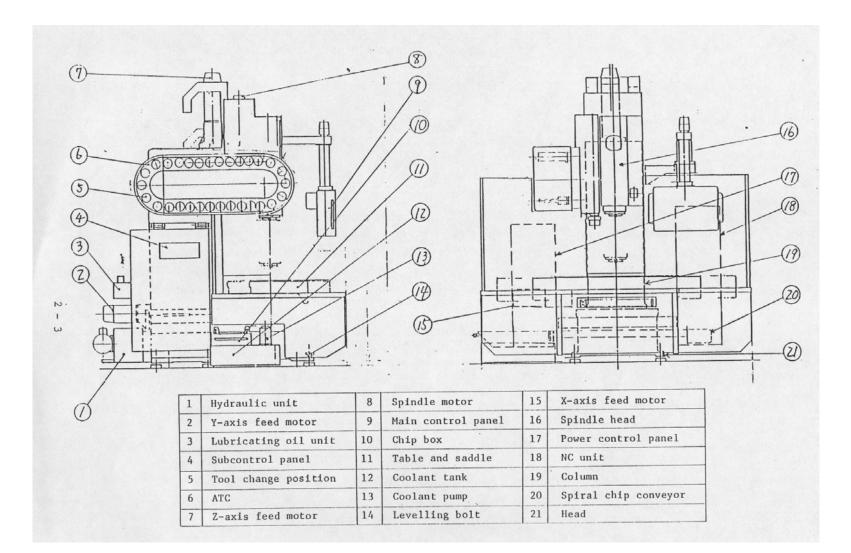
Hitachi Seiki VA35 CNC Machining Center
